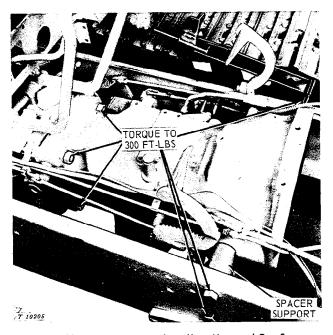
Torquing Attaching Hex. Nuts and Cap Screws
